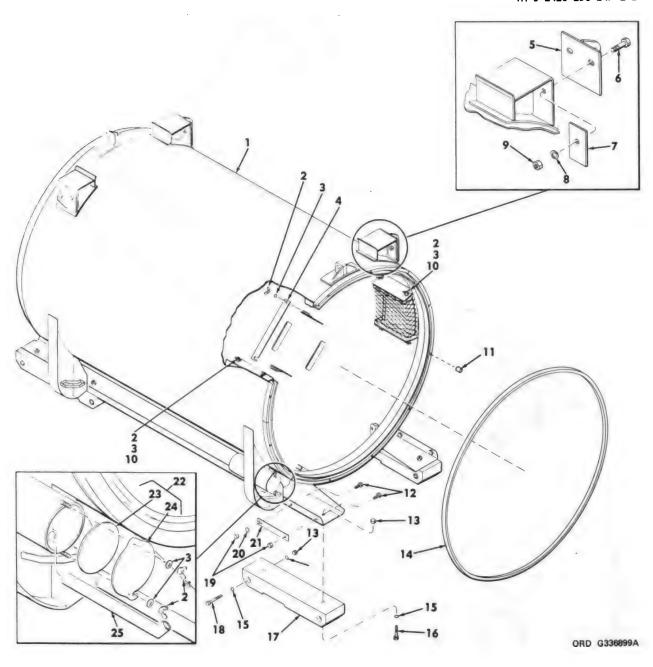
LOADING ASSEMBLY, ROCKET MOTOR /8030045 AND 8030811/ /SEE FIGURE 136 FOR NEXT HIGHER ASSEMBLY/
